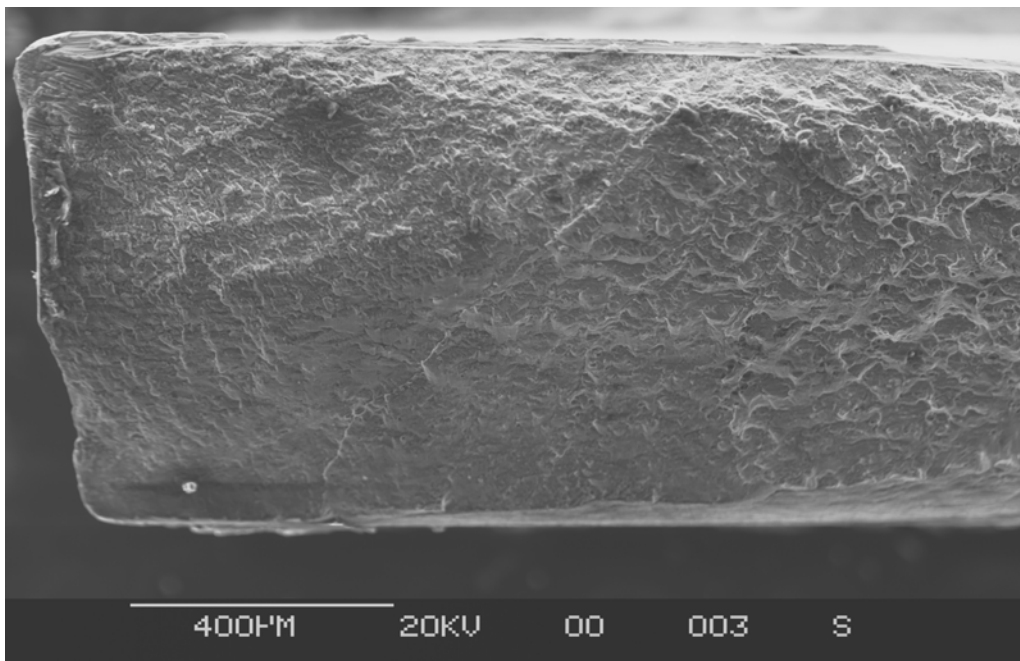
Fatigue Crack on Fracture Surface of Specimen 5708.
